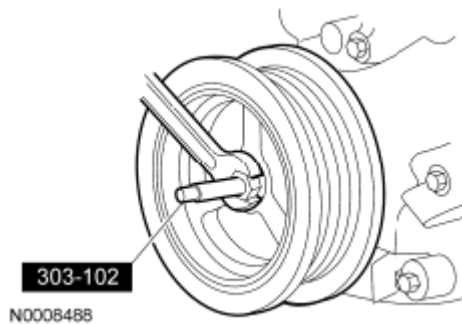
Identifying Crankshaft Vibration Damper Installer
